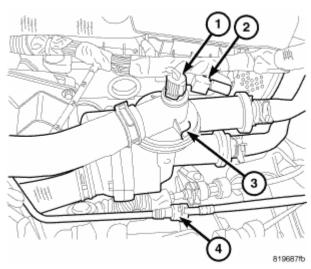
COOLANT ADAPTER Courtesy of CHRYSLER LLC
